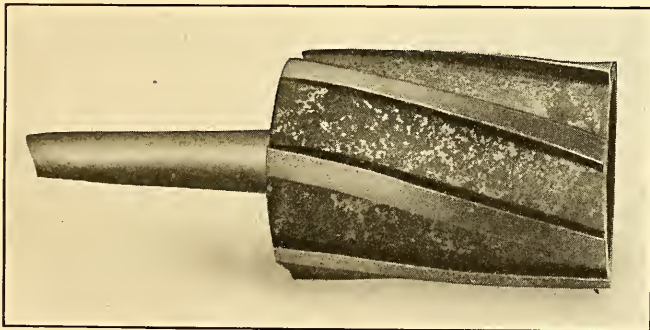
Helical Inserted-Blade Reamer Made by the Thermit Process.
